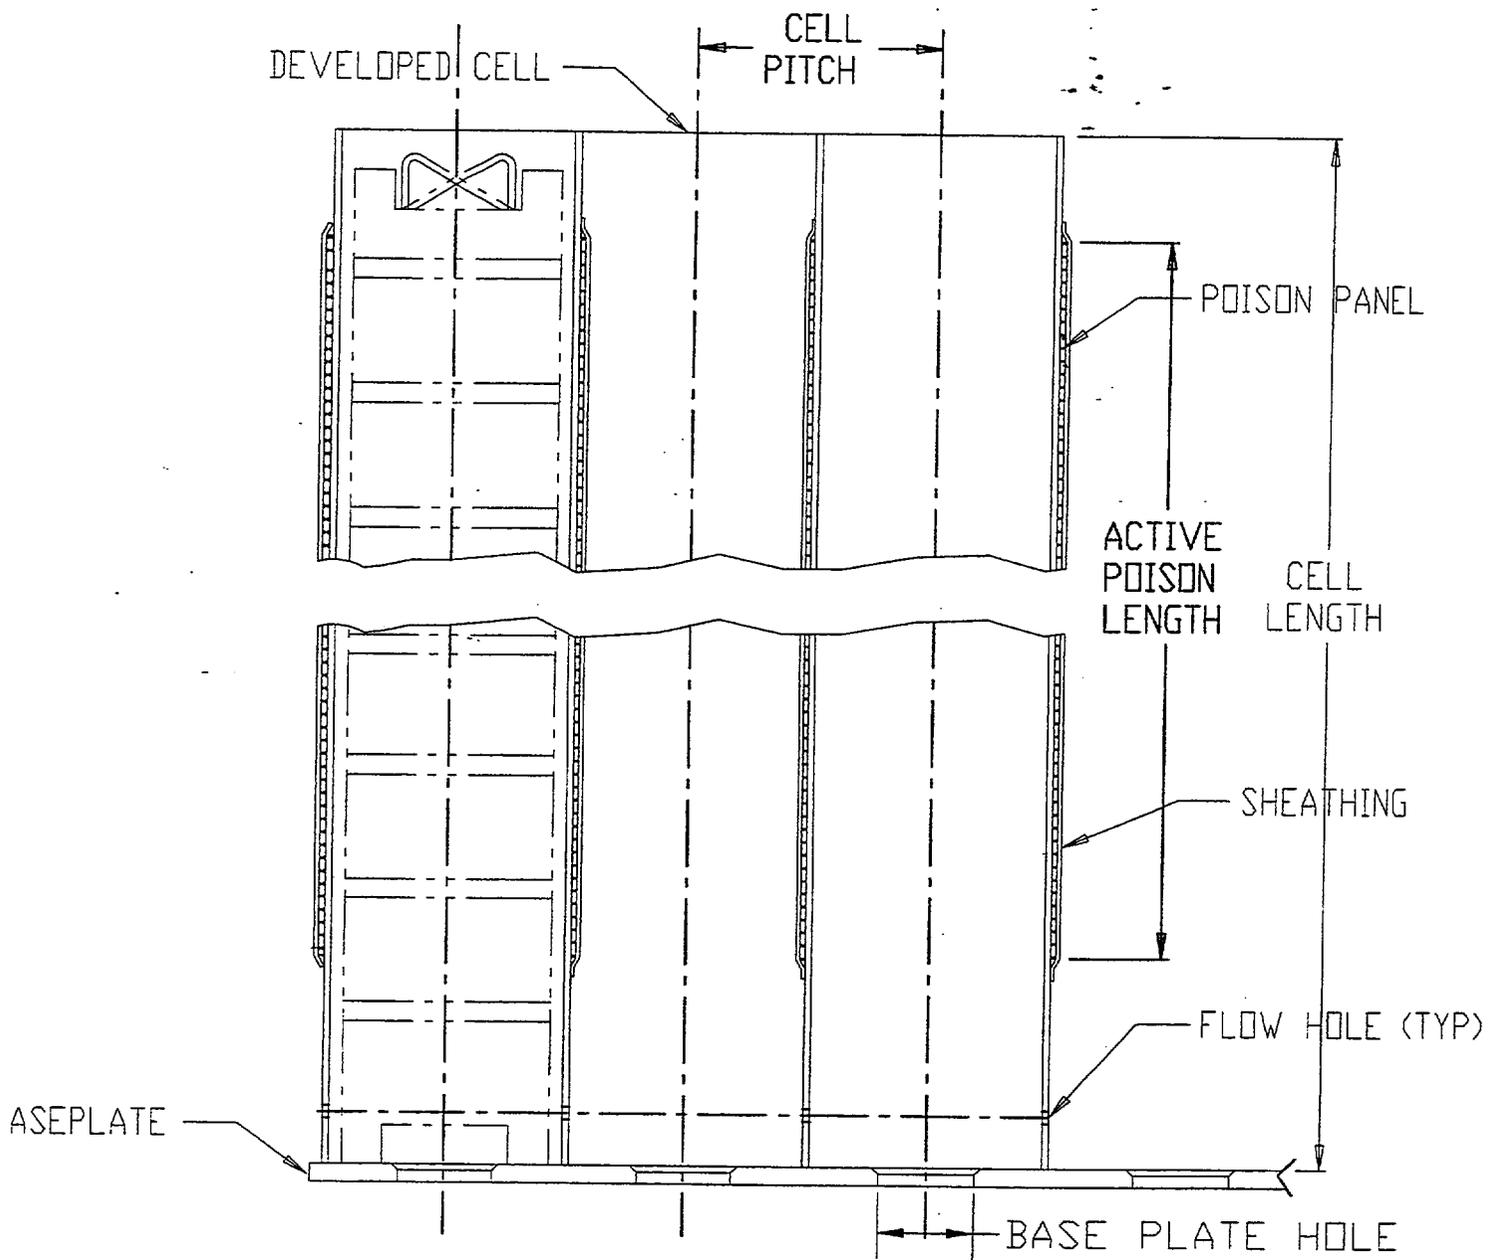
; ELEVATION VIEW OF STORAGE RACK MODULE
